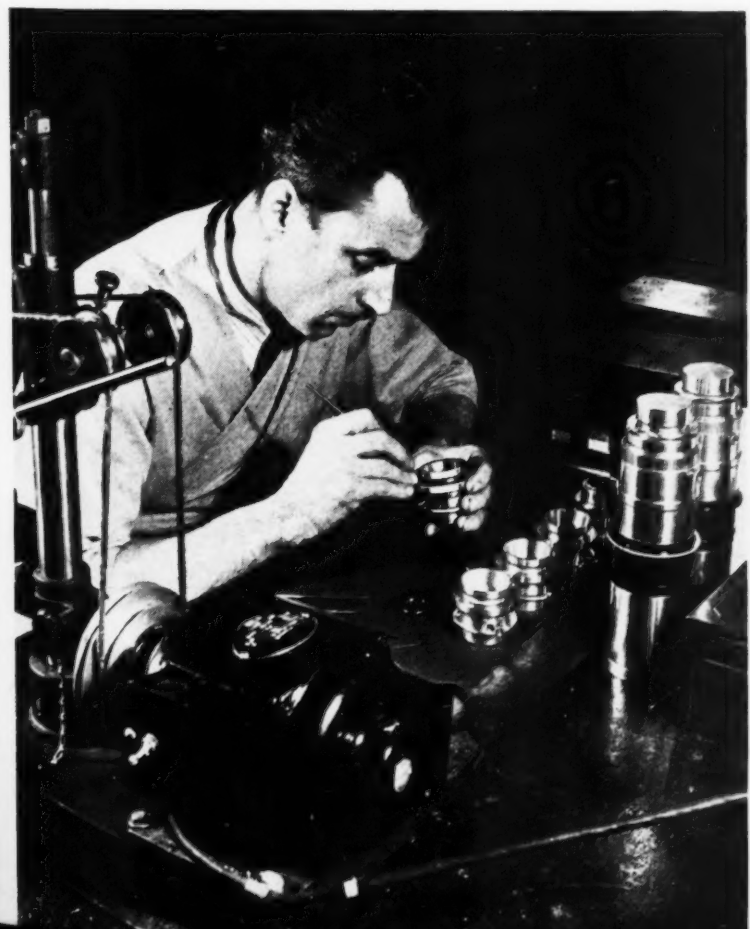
Drilling Very Small Holes in Pieces for Motion Picture Equipment
